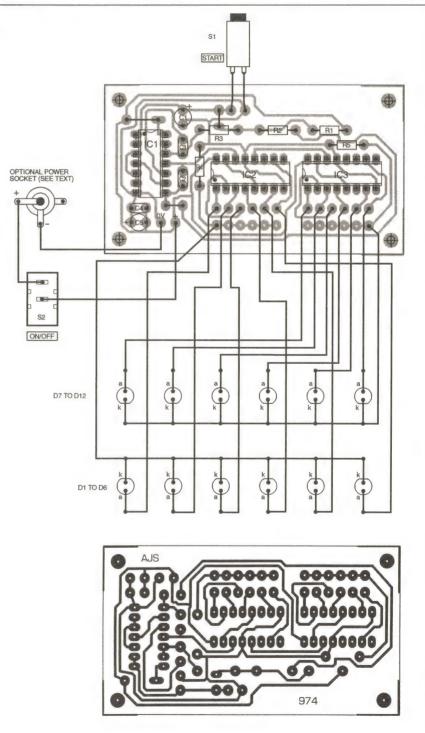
Printed circuit board component layout, interwiring and full size underside copper foil master pattern. The spare copper pads, below IC2/IC3, can be used for direct board mounting of the l.e.d.s.
